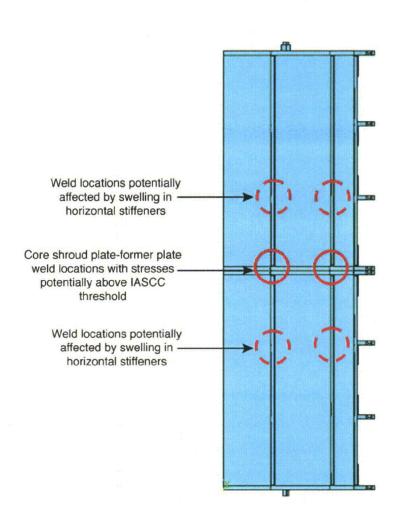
Potential Crack Locations for CE Welded Core Shroud Assembled in Stacked Sections
